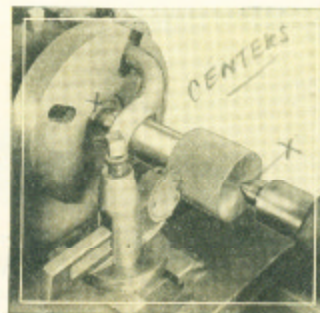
Knurling a Large Handle Held Between Lathe Centers.
